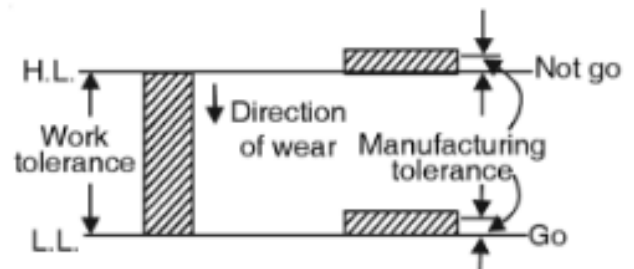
Manufacturing Tolerance (Plug Gauge)
